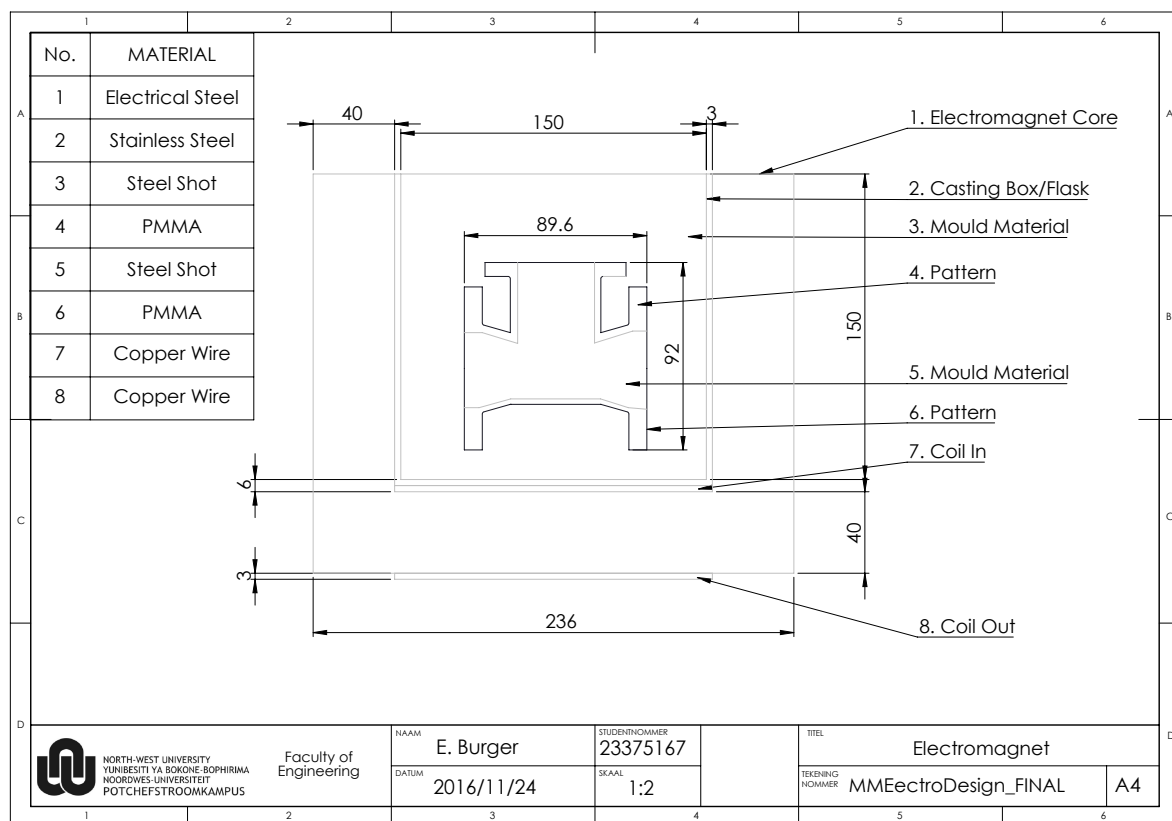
Dimensions (in mm) and materials used in the final electromagnet FEMM design
